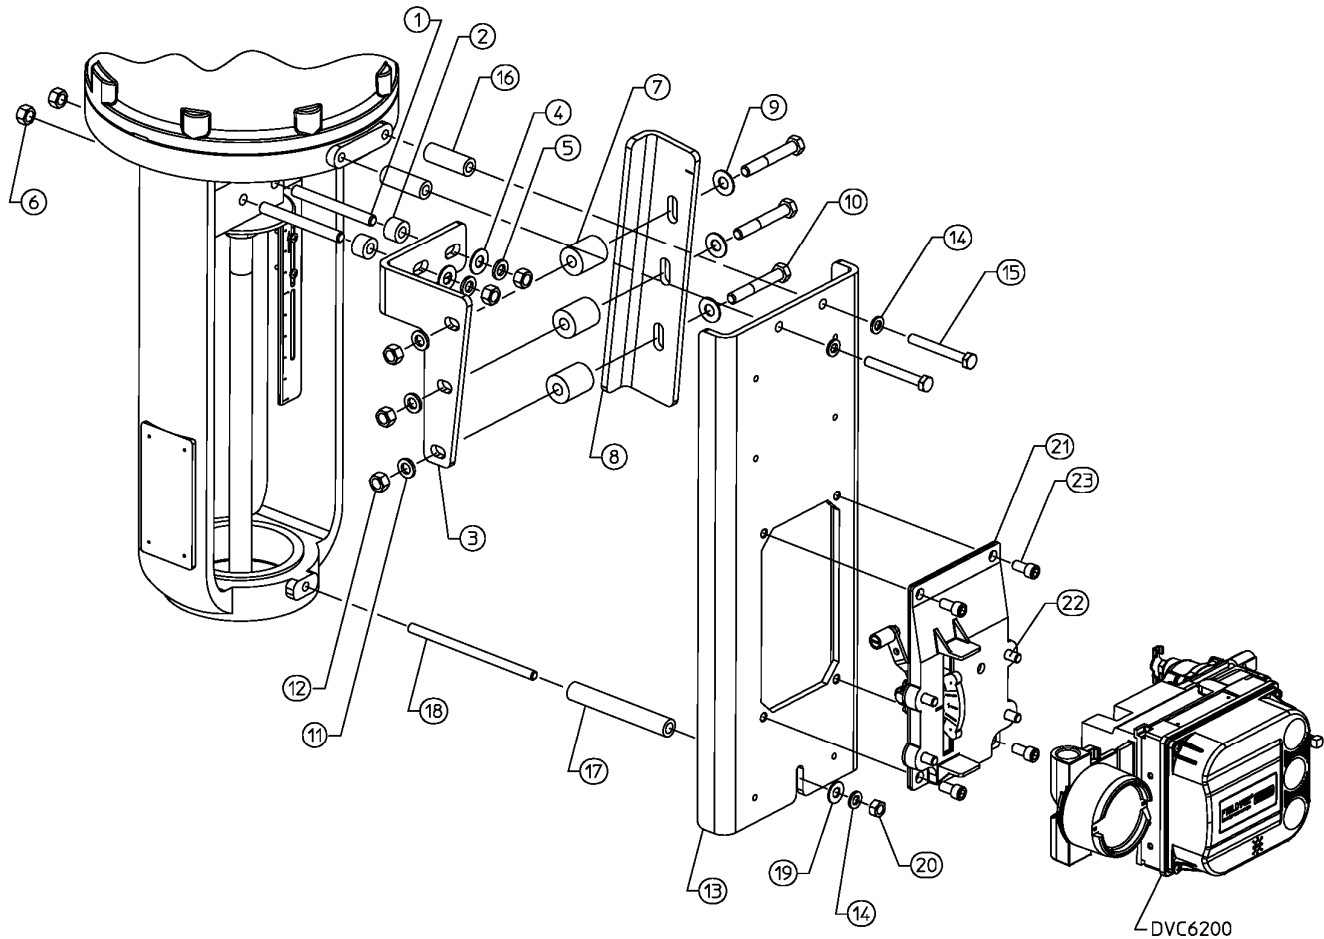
Mounting Parts Identification (with Spacer) (refer to the Parts List on page 2)
